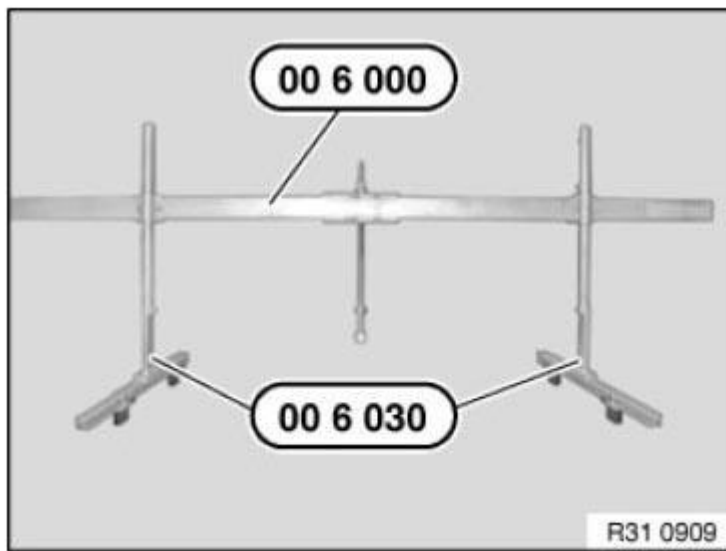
Assembling Transverse Member 00 6 000 Using Special Tools 00 6 030
